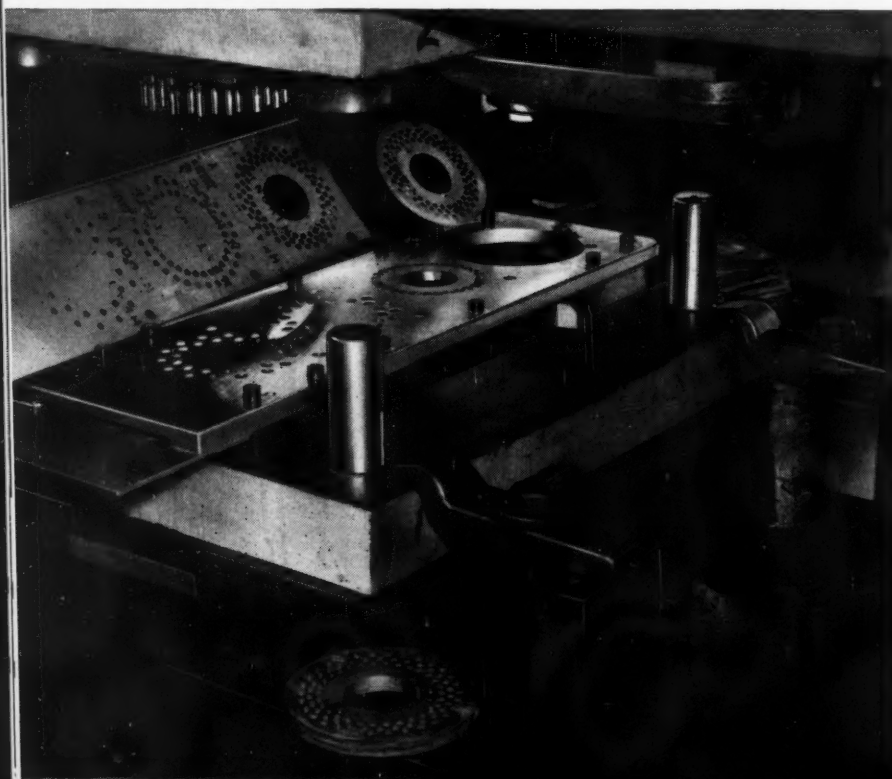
(Center) Flame-tube snout is formed to close tolerances in six draws
